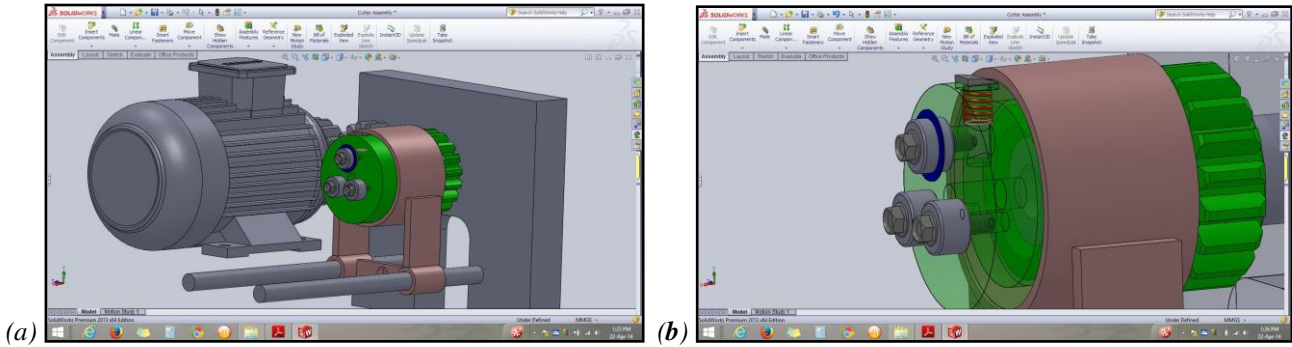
(a) Rotary Cutter Assembly with Electric Motor (b) Transparent Shaded View of Cutter Plate
